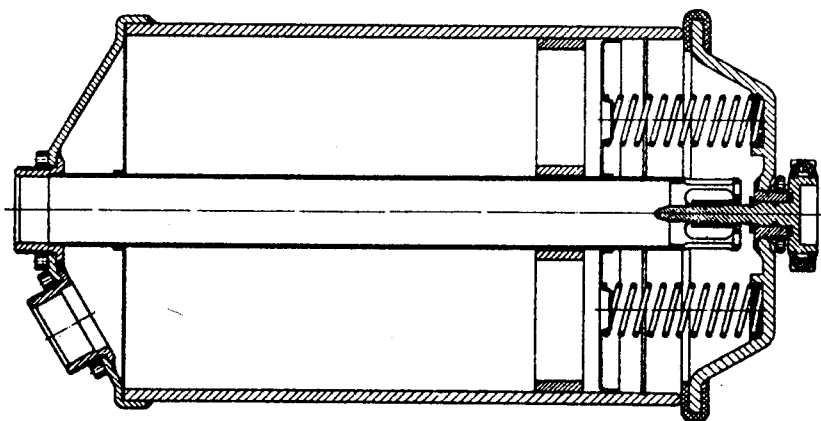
Rechargeable soda-lime cartridge (cross-section drawing)
